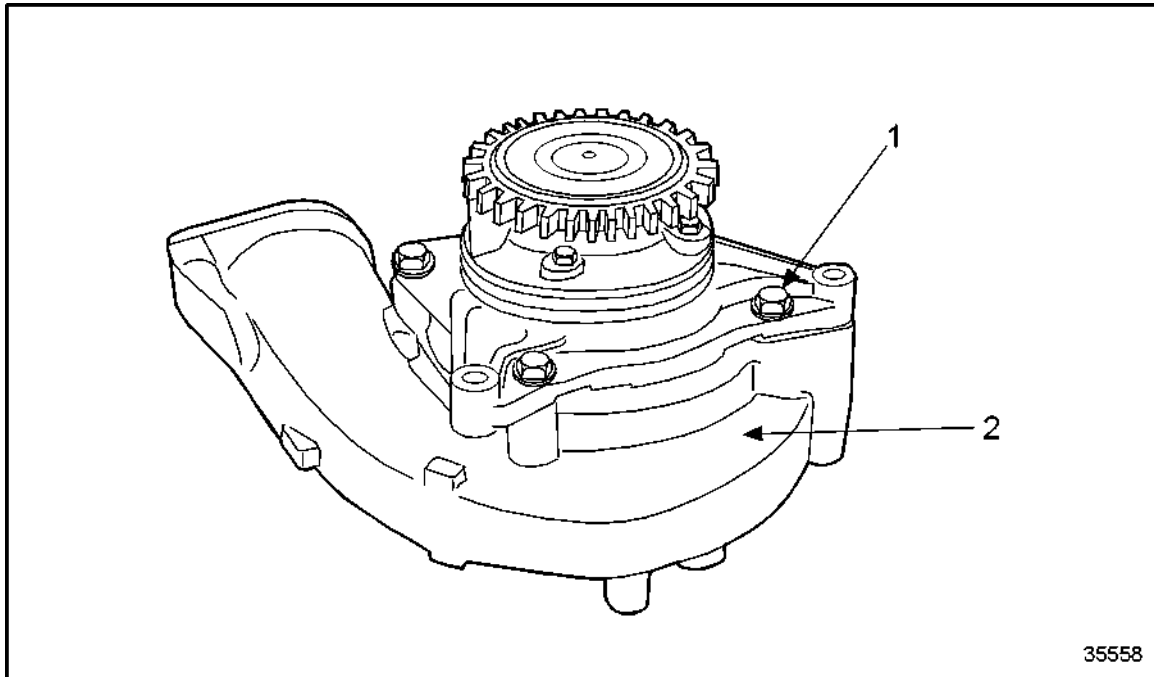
Removing Charge Air Coolant Pump from Gear Case
